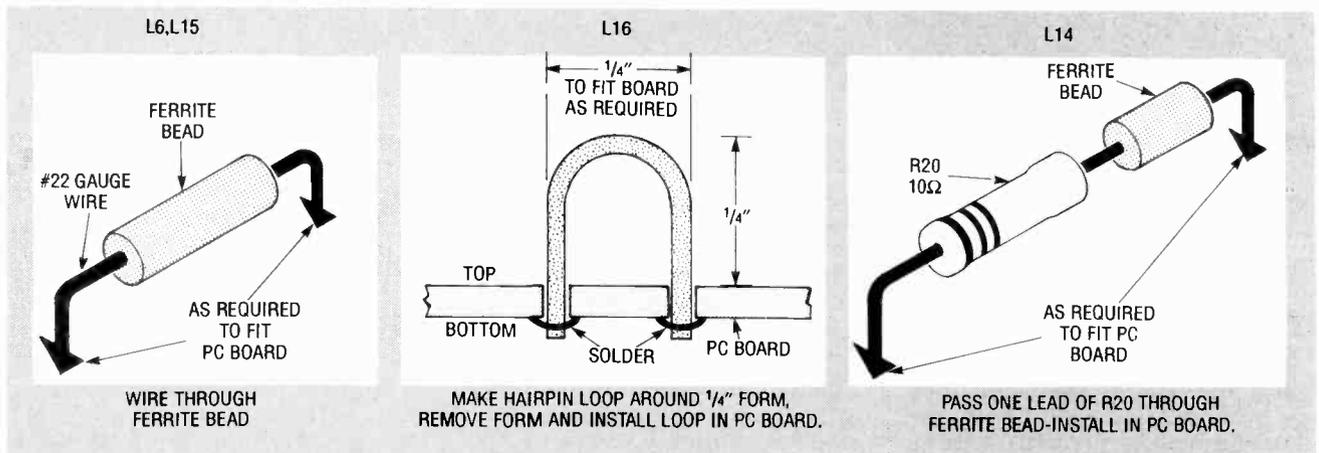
COILS L6 AND L15 are ferrite beads placed over a length of wire, L16 is just a loop of wire, and L14 is a ferrite bead placed over one lead of R20.
